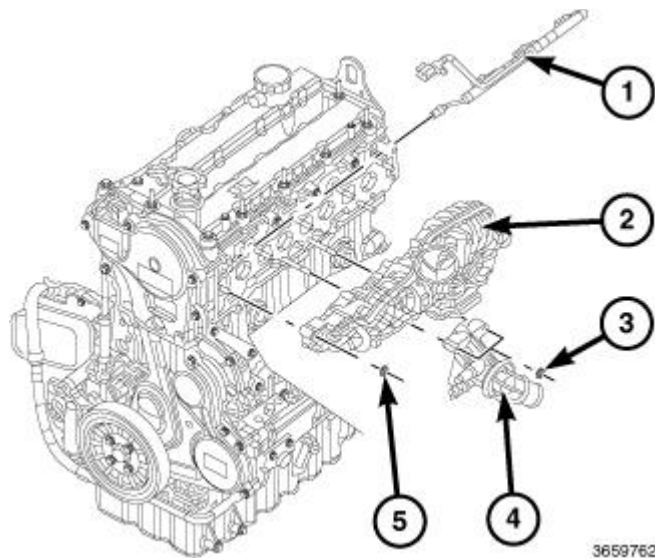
Glow Plug Harness, Intake Manifold, Thermostat Housing & Fasteners
